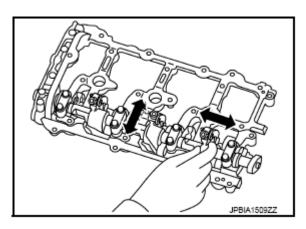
Checking Drive Shaft Back-Lash Courtesy of NISSAN NORTH AMERICA, INC.
